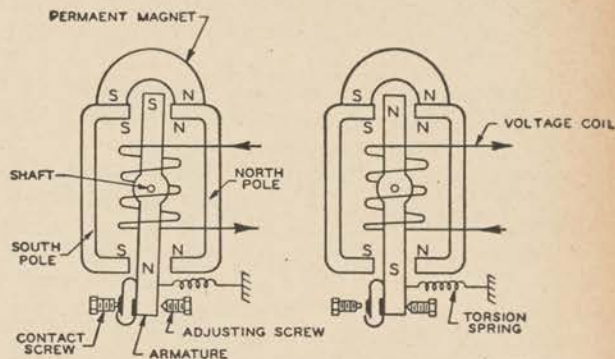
Detail drawing of Westinghouse relay-switch polarized-magnet assembly.
